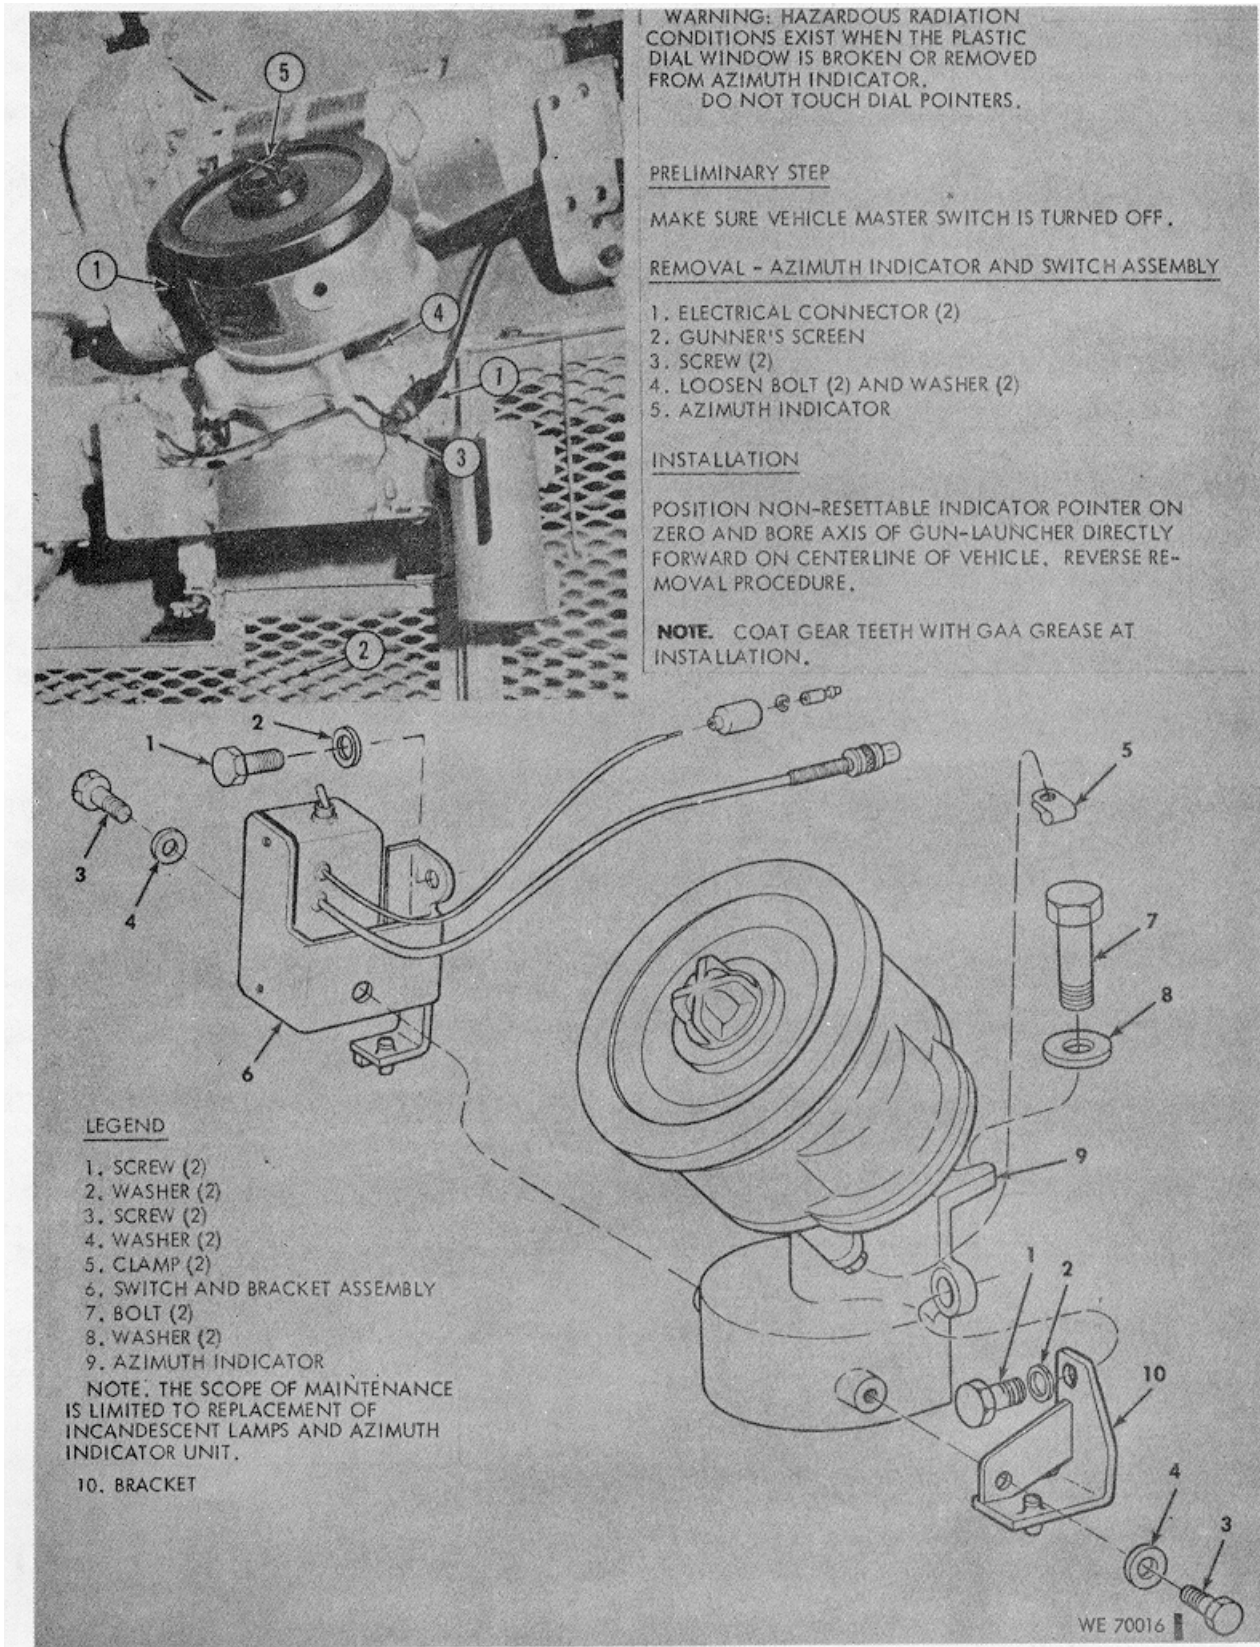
Removal/installation - azimuth indicator and switch assembly
